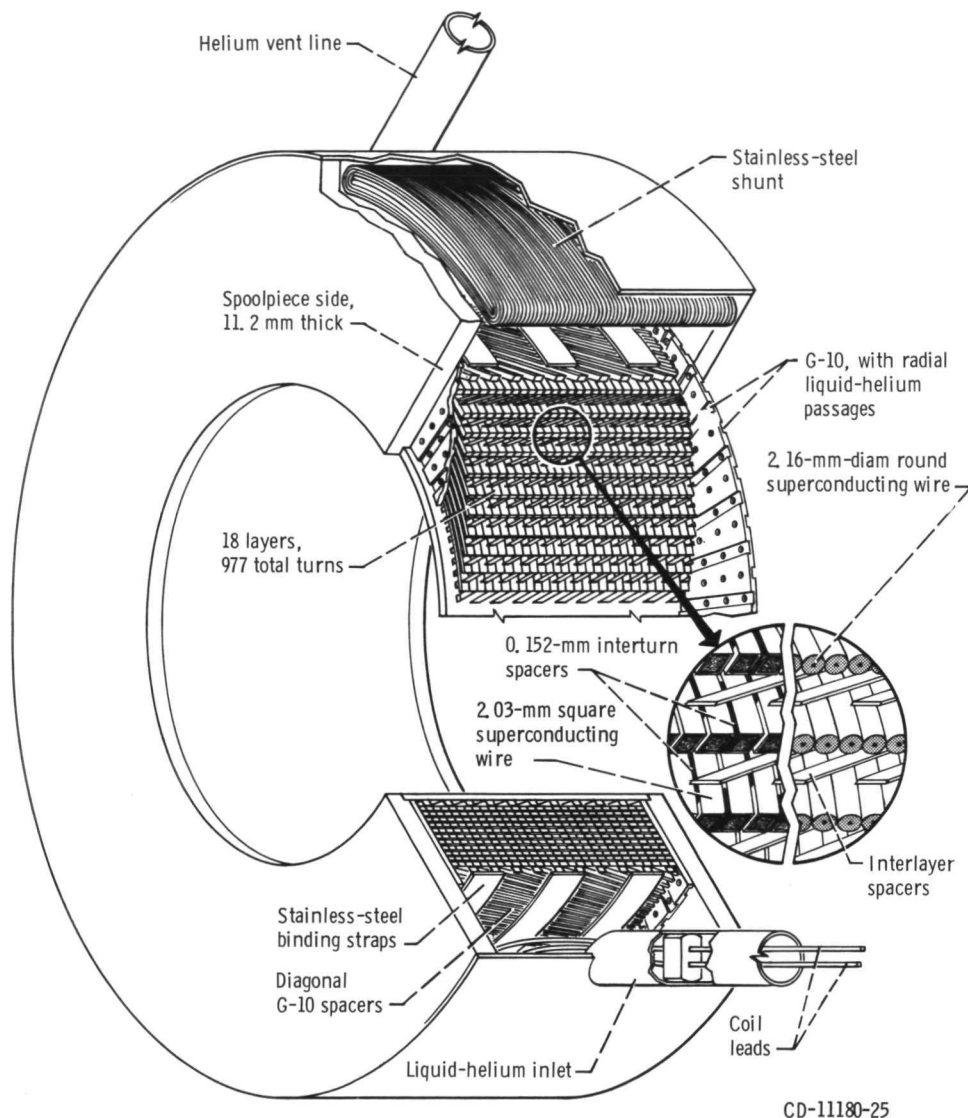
Isometric cutaway drawing of one of the 12 superconducting coils. Winding details are not to scale in that the actual coils had 18 radial layers and approximately 54 turns along the axis per layer. Insert shows details of cooling passages utilized in both round and square wire coils. Inside diameter of spoolpiece, 210 millimeters; outside diameter of spoolpiece, 406 millimeters; inside diameter of windings, 218 millimeters; outside diameter of windings, 305 millimeters; axial width of windings, 120 millimeters; axial width of spoolpiece, 146 millimeters.
